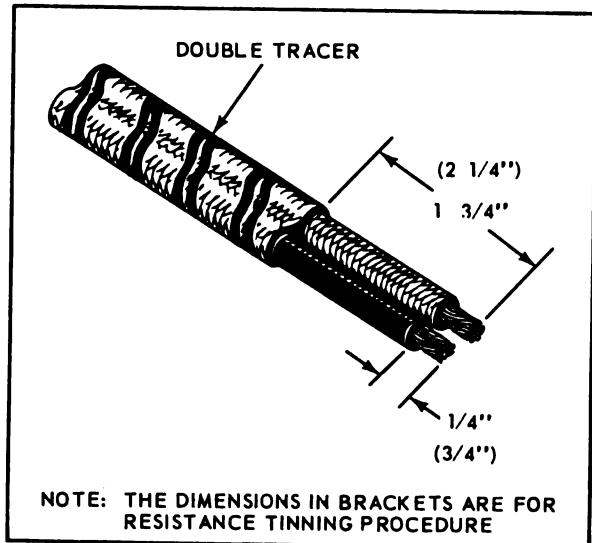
Stripping Thermocouple Wire for Terminal and for AN 5537 Connector Installation
